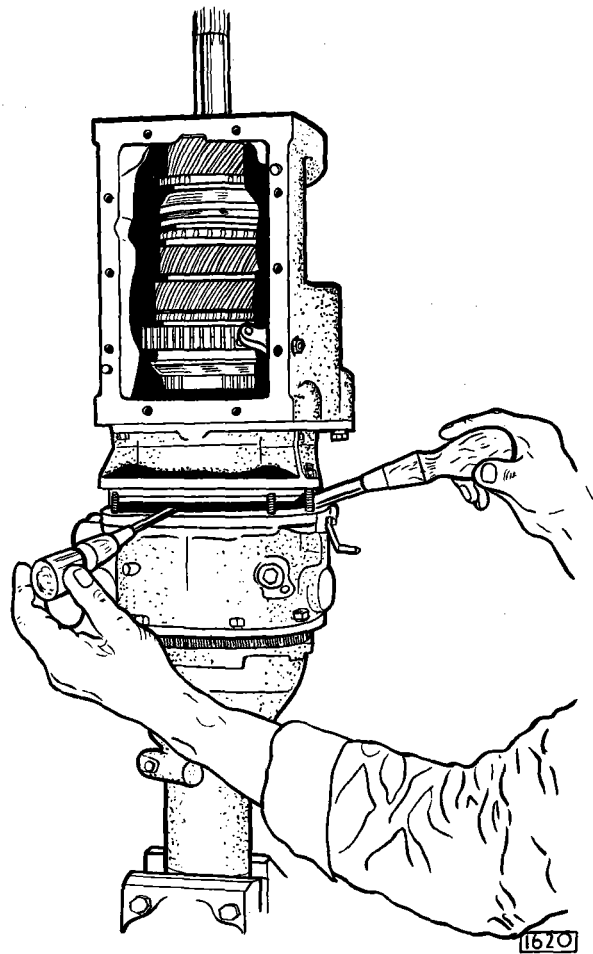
When fitting the overdrive to the gearbox, compress the oil pump plunger and align the operating cam with the plunger roller.
